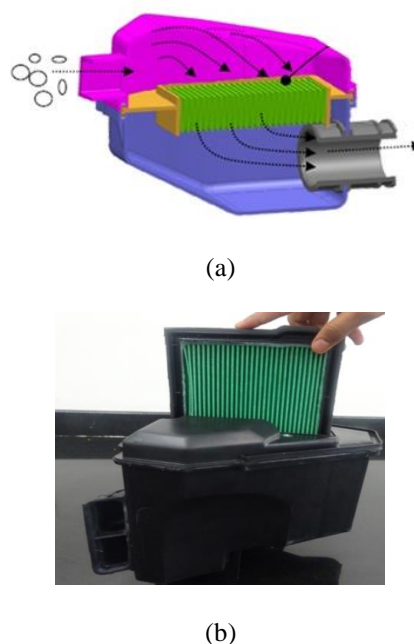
(a) Schematic of an engine intake air filter assembly; (b) Photograph of a prototype assembly developed in this work
